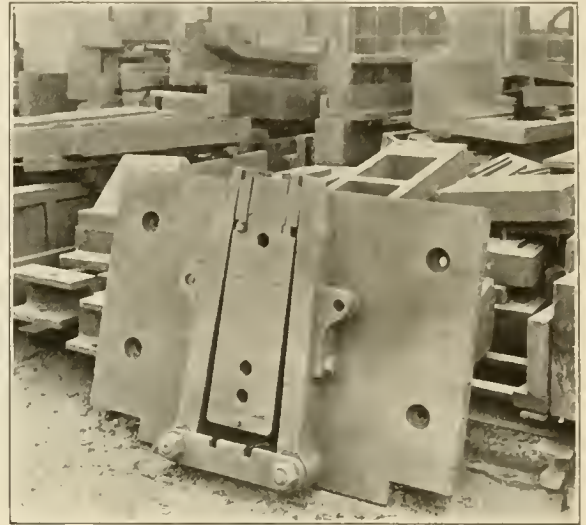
DIES FOR FORMING DRAWBEAR YOKES.
